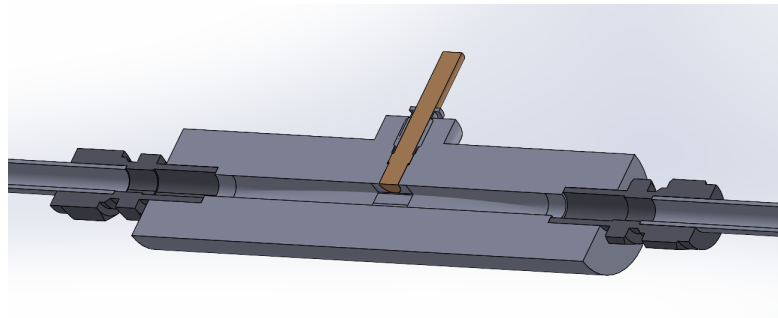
CAD drawing of the sensor manifold. The sensor is shown with a different colour.
